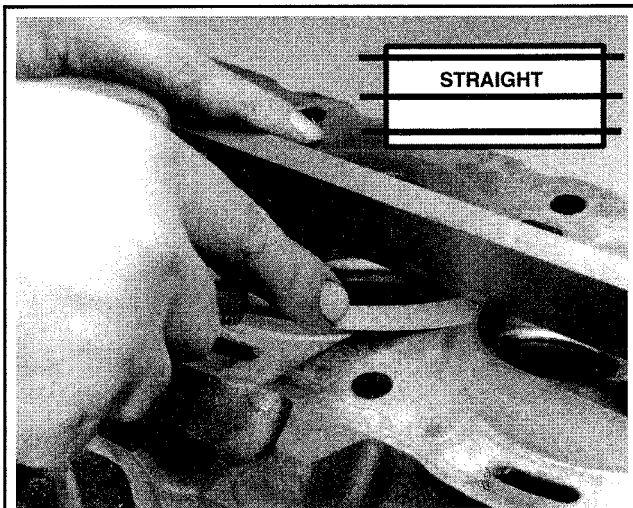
Use a machinist's straightedge and a feeler gauge set to check the cylinder head for warpage across the mating surfaces, both straight across...
